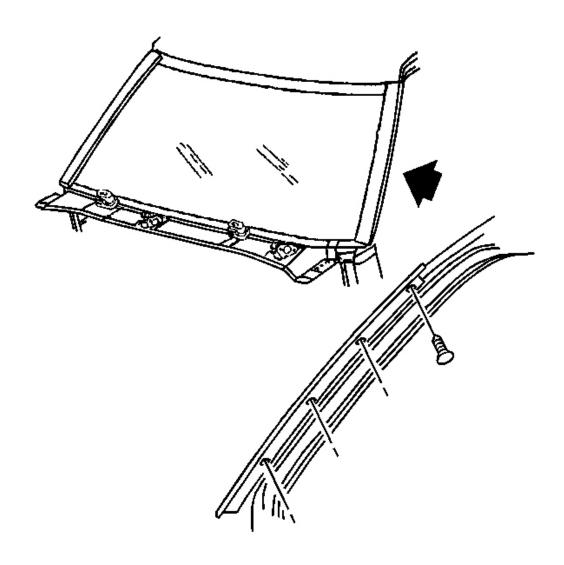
View Of Front Door Sealing Weatherstrip Courtesy of GENERAL MOTORS CORP.
